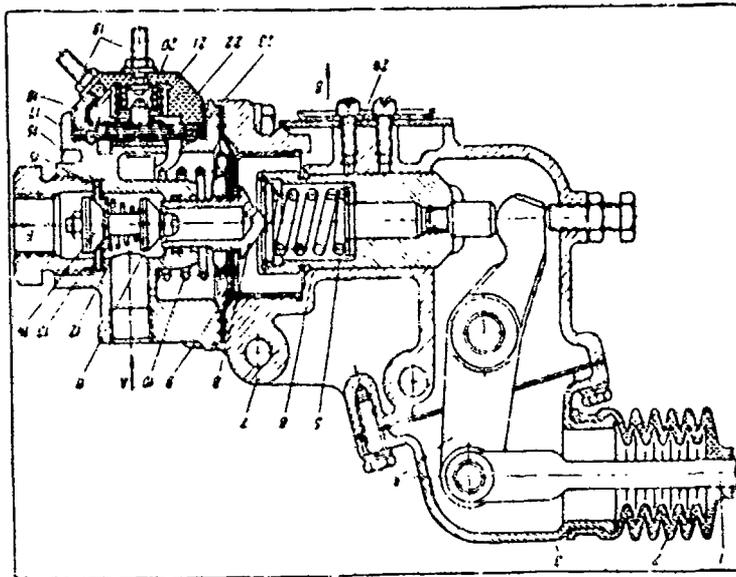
Individual Brake Valve: A, compressed air input to brake cylinders of tractor; B, compressed air input from air cylinders; C, air exhaust to atmosphere; 1, arm; 2, protective boot; 3, lever cover; 4, lever; 5, balancing spring; 6, balancing spring cup; 7, valve body; 8, exhaust valve seat; 9, diaphragm; 10, diaphragm return spring; 11, exhaust valve; 12, valve return spring; 13, brake valve cap; 14, intake valve; 15, adjusting inserts; 16, intake valve seat; 17, stop signal switch diaphragm; 18, cross piece; 19, terminal; 20, moving contact; 21, contact spring; 22, switch body; 23, channel for compressed air feed to switch diaphragm; 24, exhaust window valve
